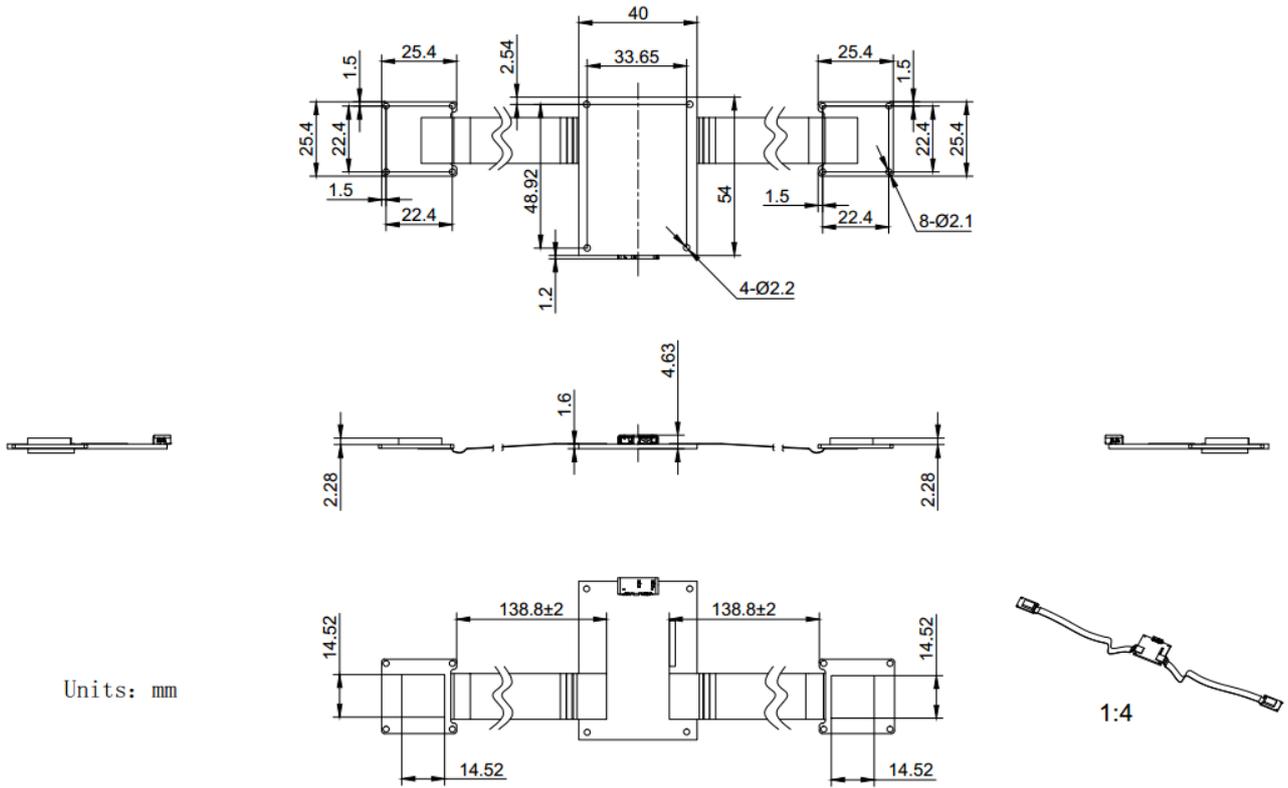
Split USB3.0 binocular camera mechanical dimensions (No-Mount)
